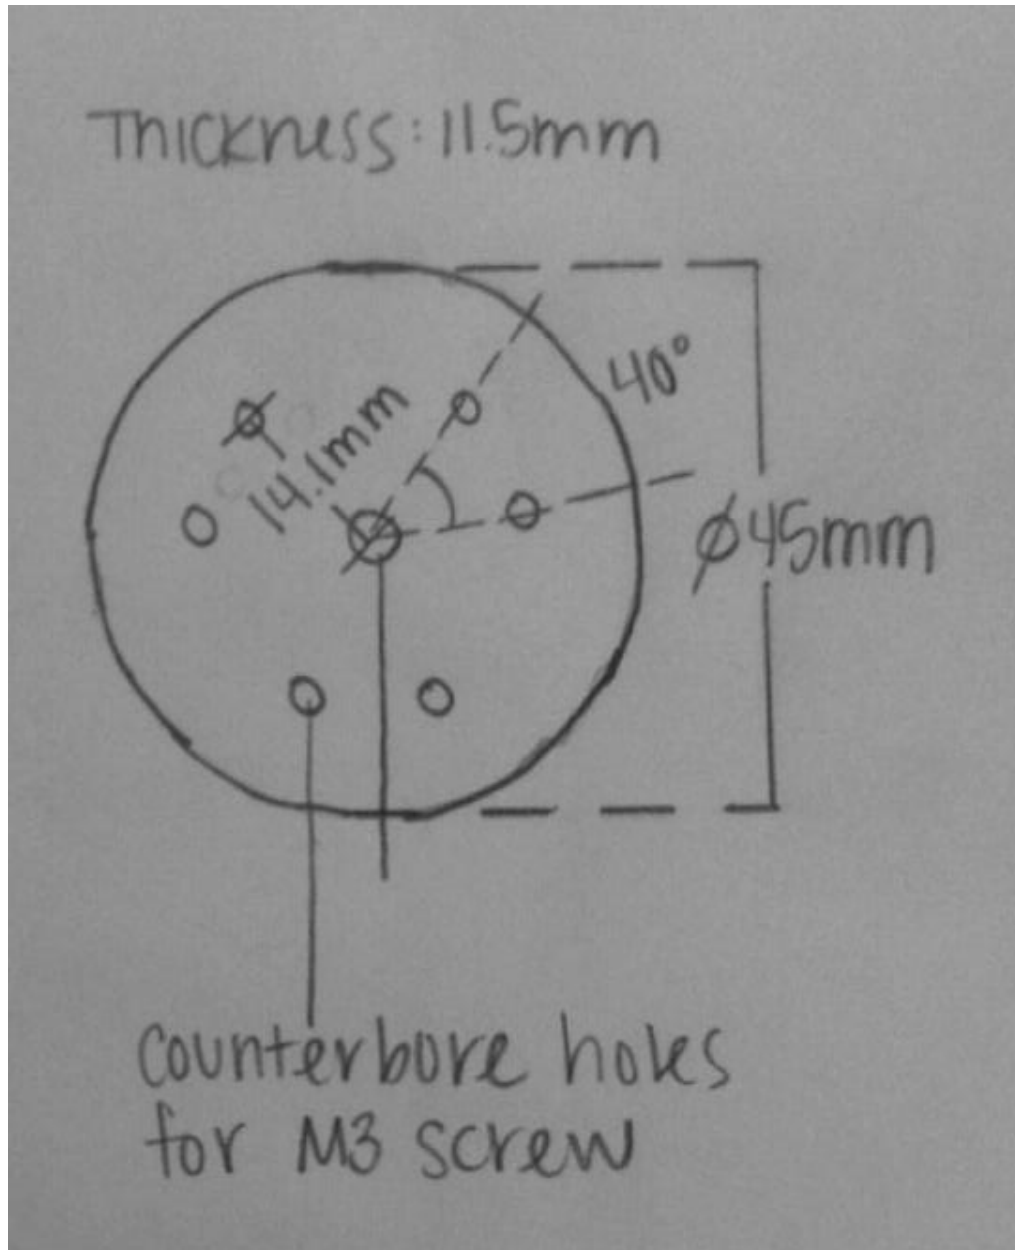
Machine drawing of force sensor mounting plate – handle side.
